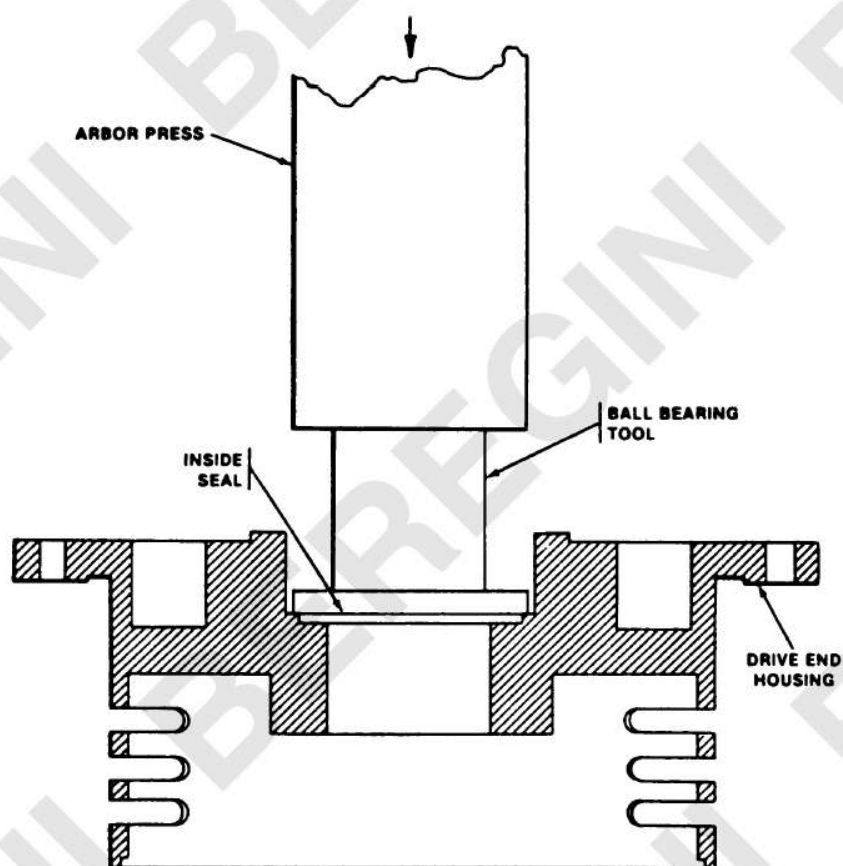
Assembly of Inside Seal in Drive End Housing Assembly.
